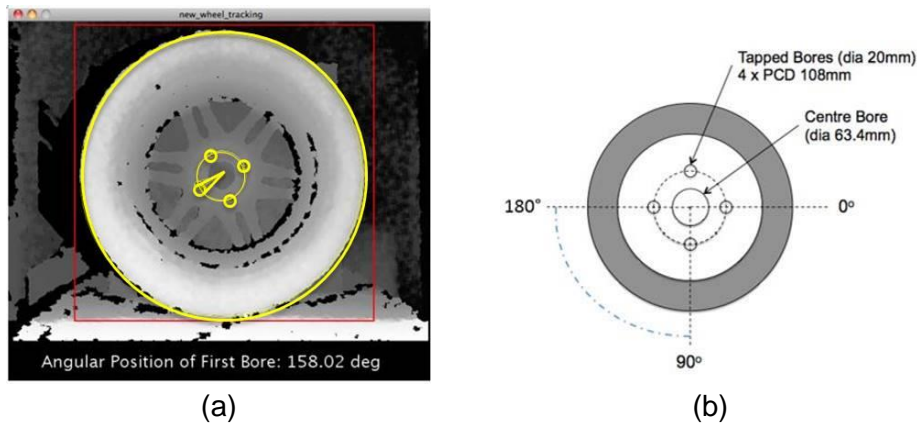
(a) Recognised wheel and wheel bores and (b) 2D wheel drawing
